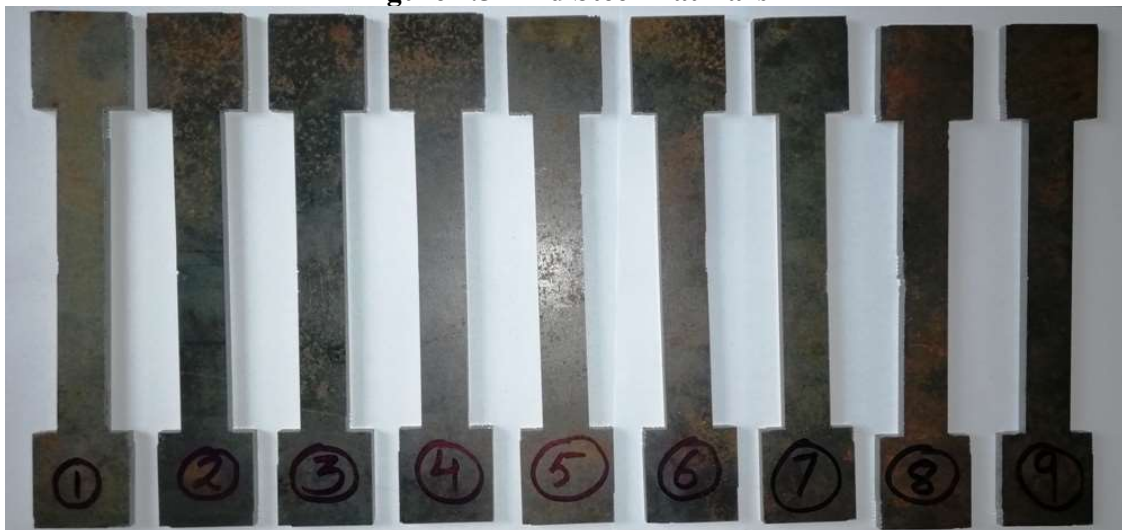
I-shaped specimens of MS bar prepared on laser cutting machine
